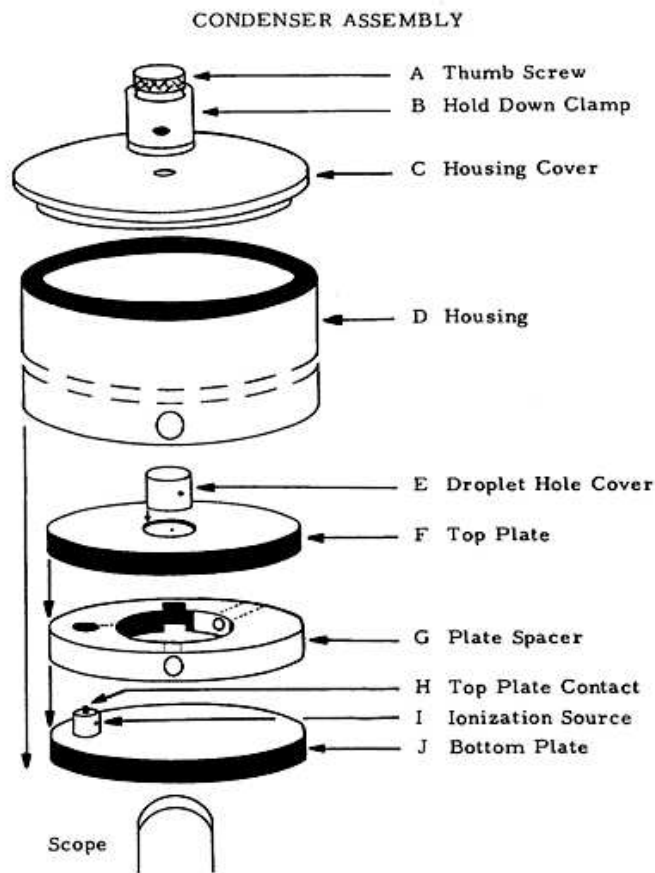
Exploded view of the droplet viewing chamber. Source: PASCO scientific.
